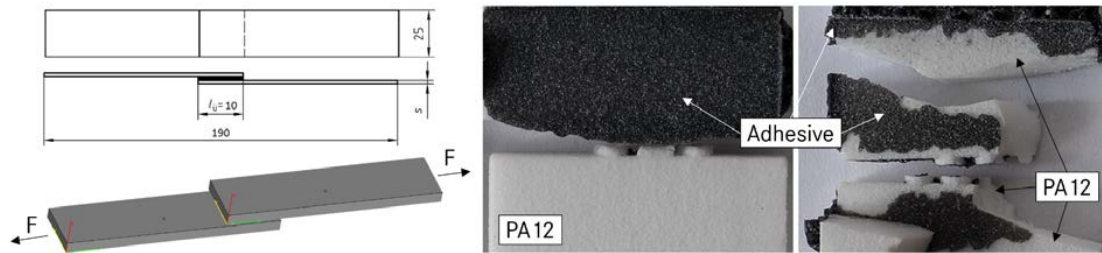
Tensile shear specimen dimensions (left), adhesive delamination of the adhesive (center), substrate fracture (right)
